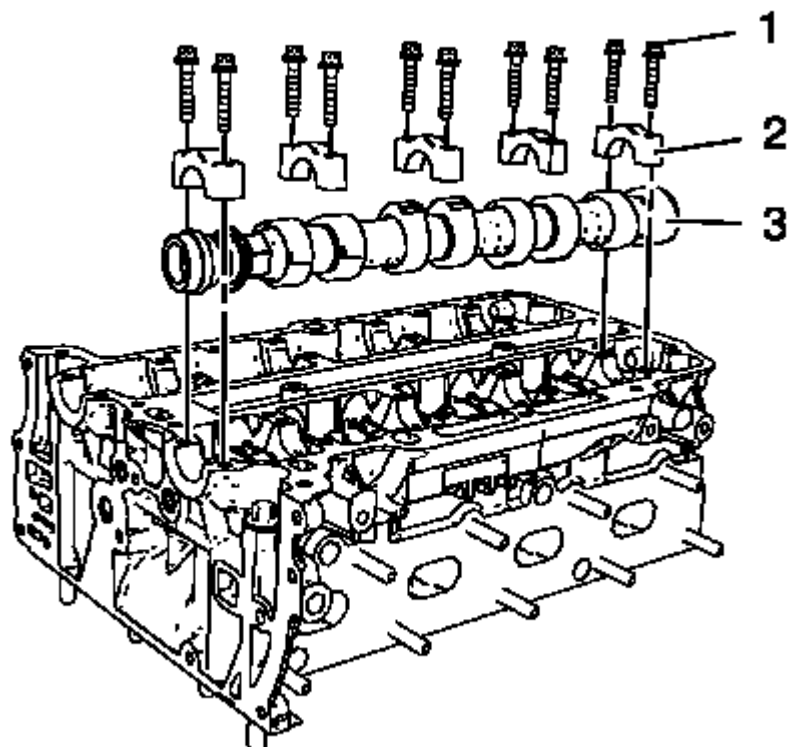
Exhaust Camshaft, Camshaft Bearing Caps And Bolts
